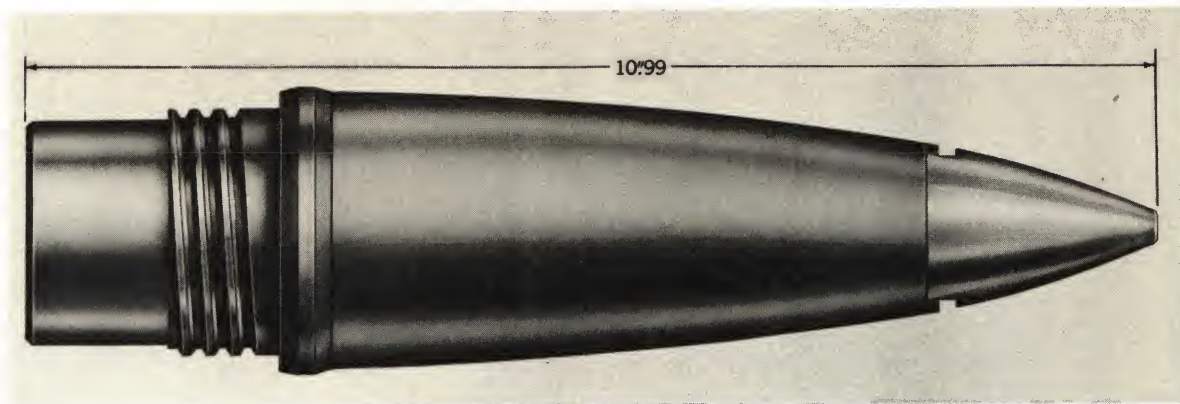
2.75-Inch Rocket Head Mk 1 Mod 5 (HE or PRAC), External View.
